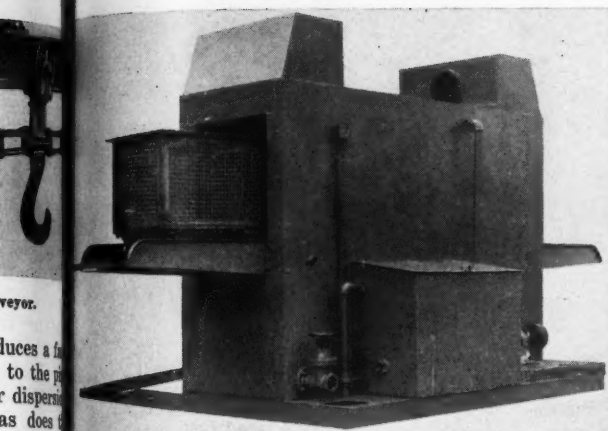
Special Washing Machine for Sheet Metal Stampings. Built without power conveyor. Machine arranged to be set in pit so that wire mesh truck can be pushed into it from floor level and pushed out of opposite side.
